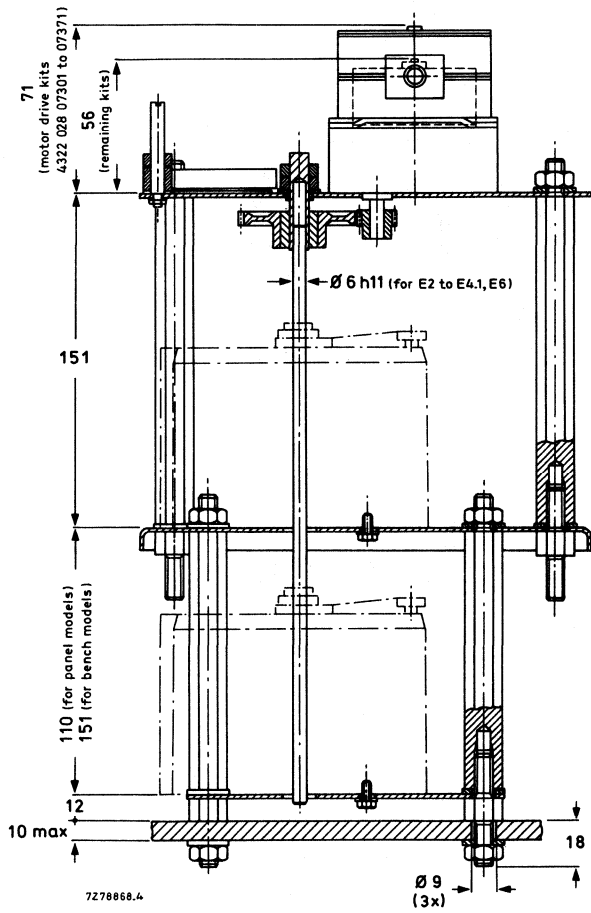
Motor drive for two ganged transformers with size code E2, E3, E3.1, E4, E4.1.
